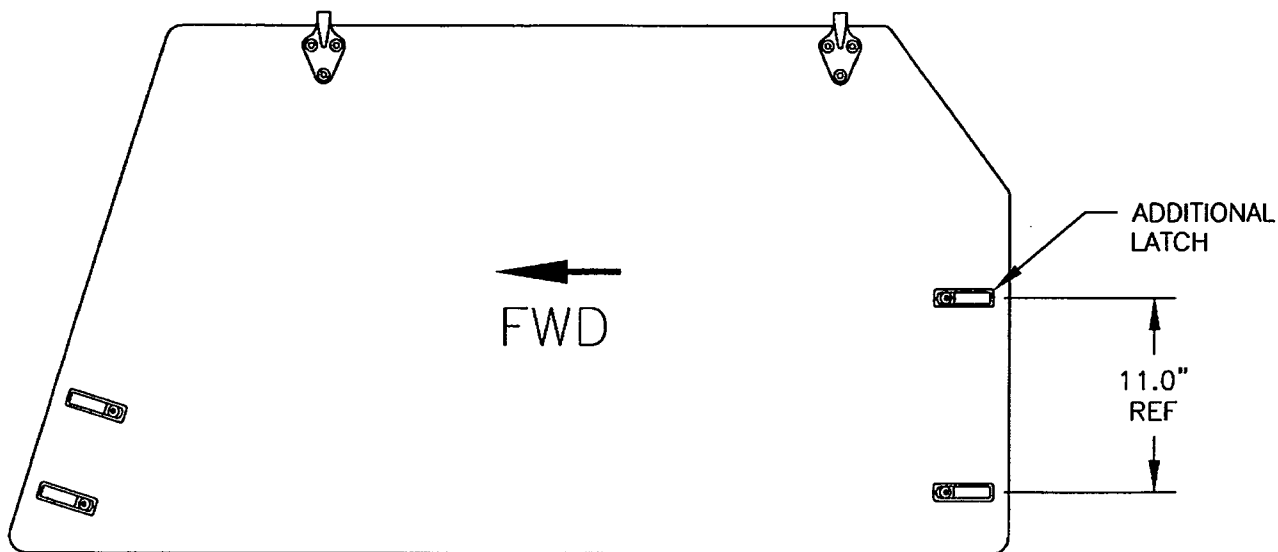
D350-589-041 DOOR ASSEMBLY (SHOWN)
